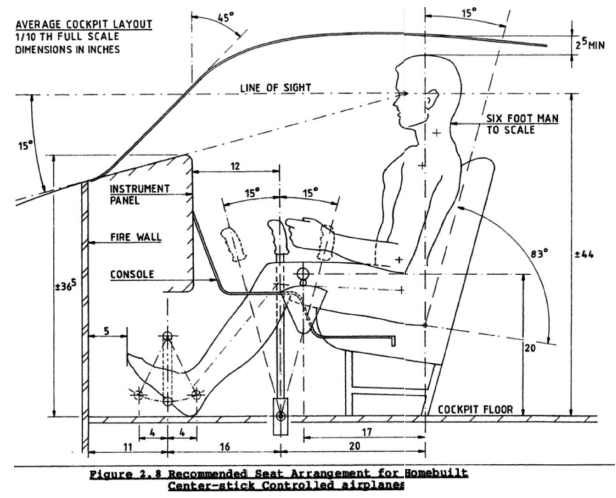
Recommended Cockpit Dimensions Homebuilt Aircraft [in]
